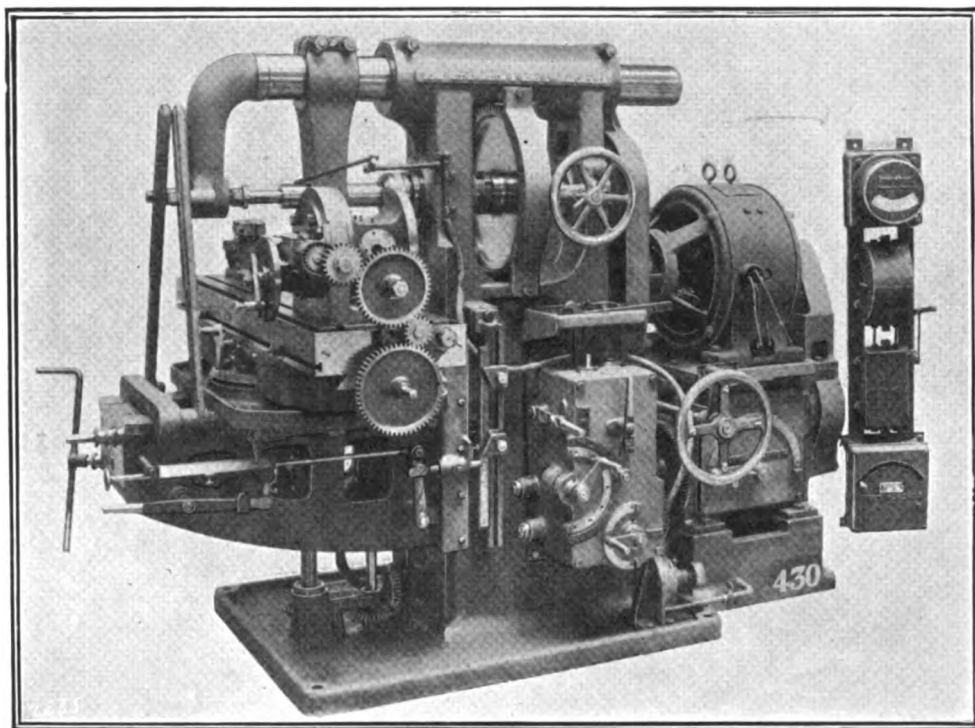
HETHERINGTON HIGH-SPEED UNIVERSAL MILLING MACHINE.
